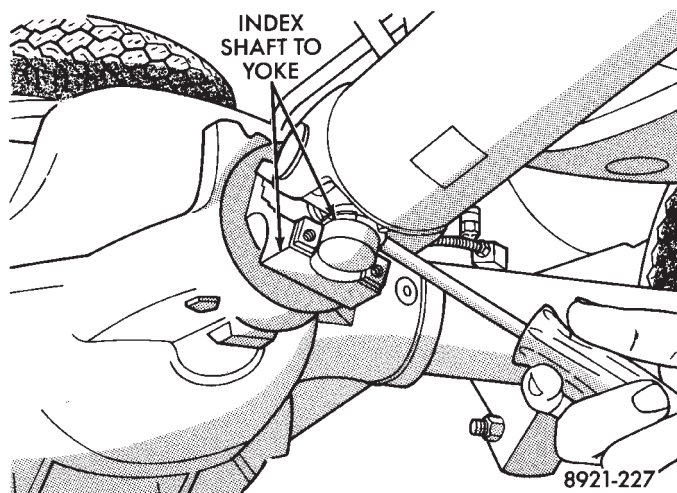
Marking Propeller Shaft And Yoke For Alignment Reference
